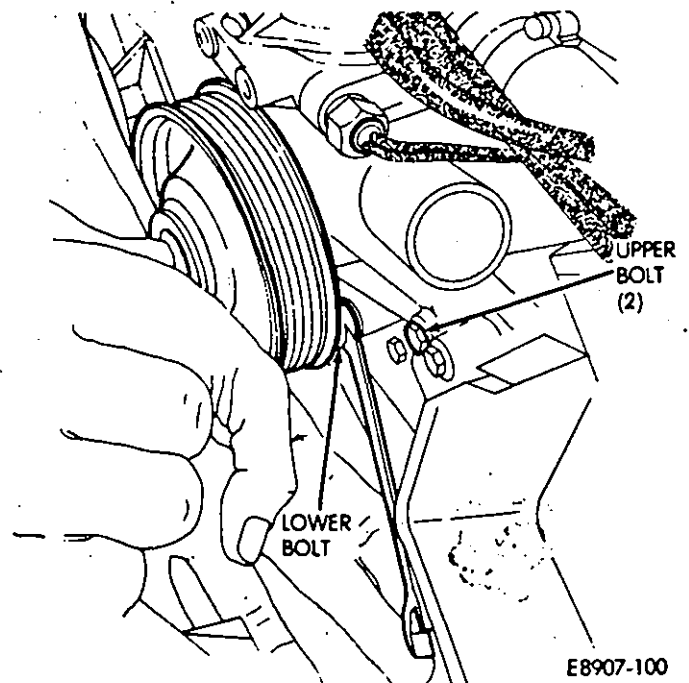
Water Pump Lower Mounting Bolt Removal/Installation
